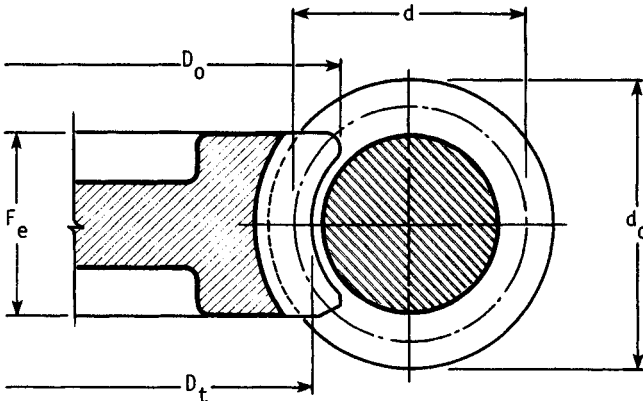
Section of worm and gear. Note that corners of gear teeth are usually rounded, as shown above the gear centerline; they may, however, be chamfered, as shown below.
